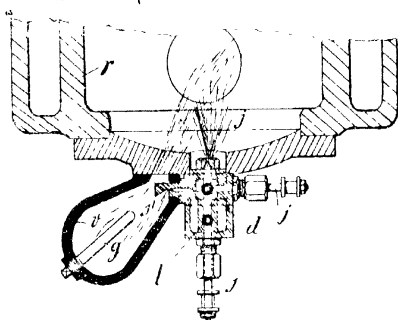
Sectional plan showing ignition and vaporising process used in the Blackstone residual-oil engine with double jet compressed air atomiser.
